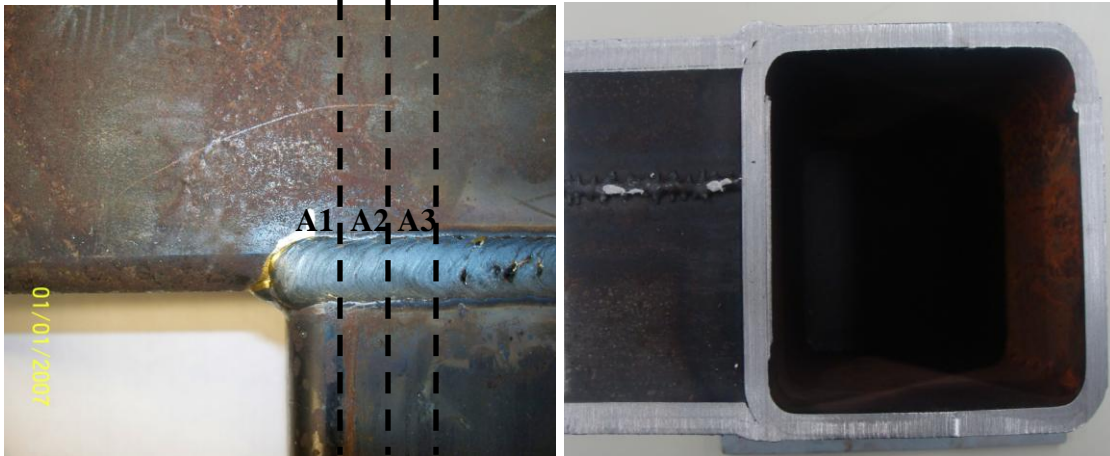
a) Couped sample and b) weld profile shown for the cut made along line A3
